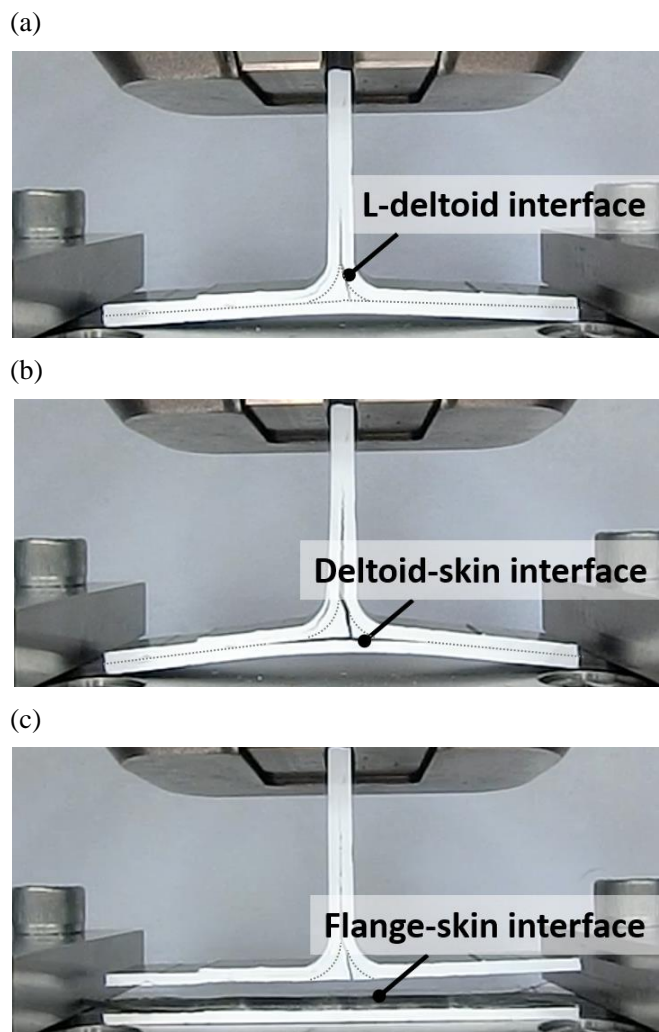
Failure flow of T-joint specimen without arrester.
